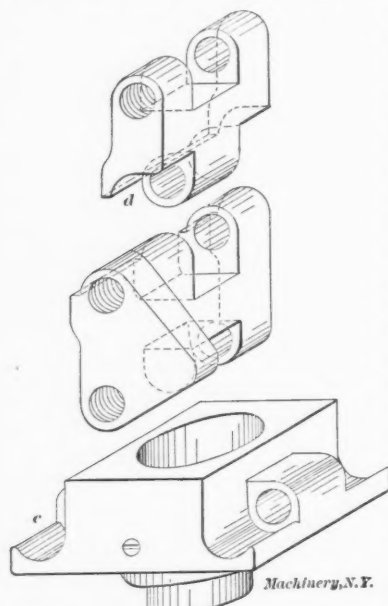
Isometric View of Toggle-joint and Punch Holder.
